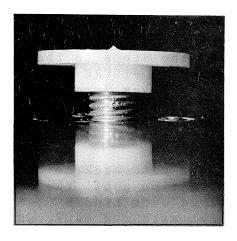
Place the Clamp Pad on the Shaft.
